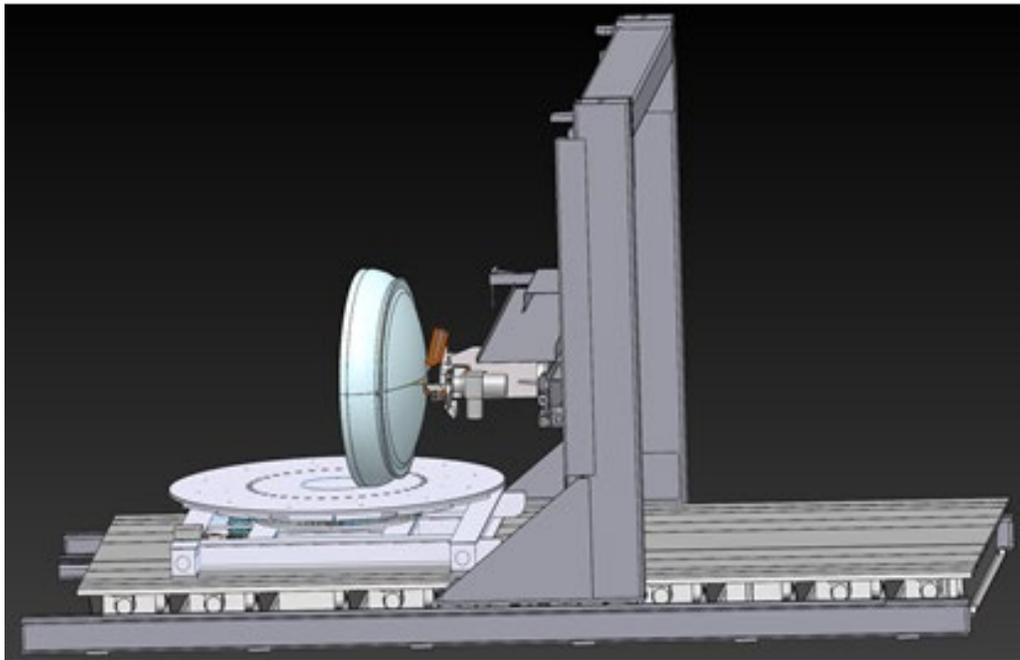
EB welding of the lower and upper heads will be performed in the horizontal position.
